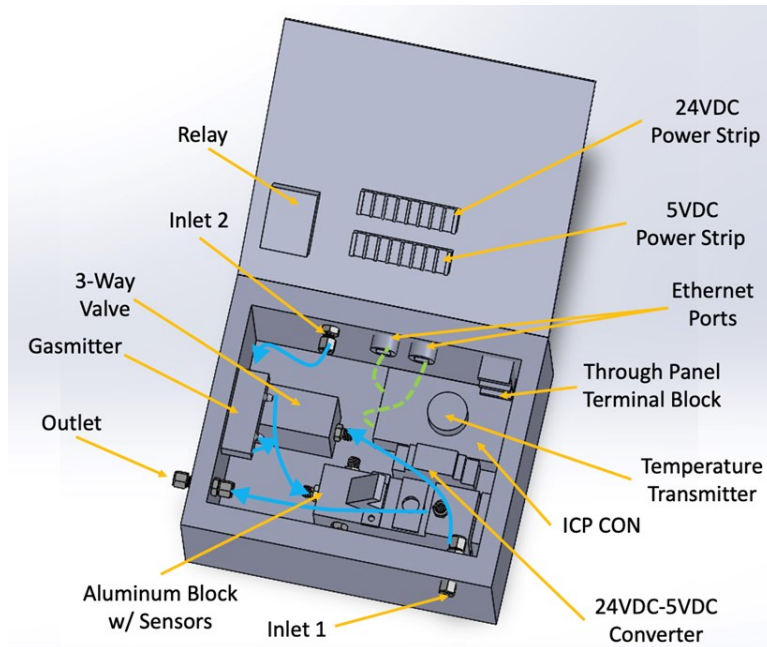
Prototype with All Sensors and Electronics Mounted within the Enclosure.
